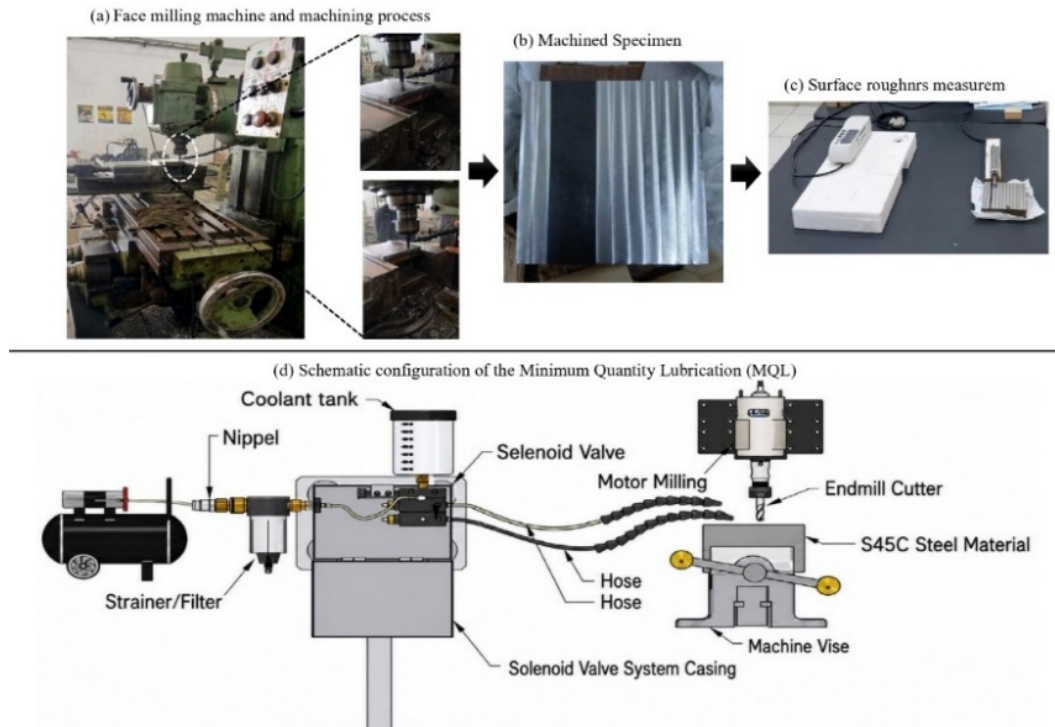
Experimental setup consisting of; (a) the face milling process on a conventional milling machine, (b) machined specimen, (c) surface roughness measurement using a portable roughness tester. (d) the schematic configuration Minimum Quantity Lubrication
